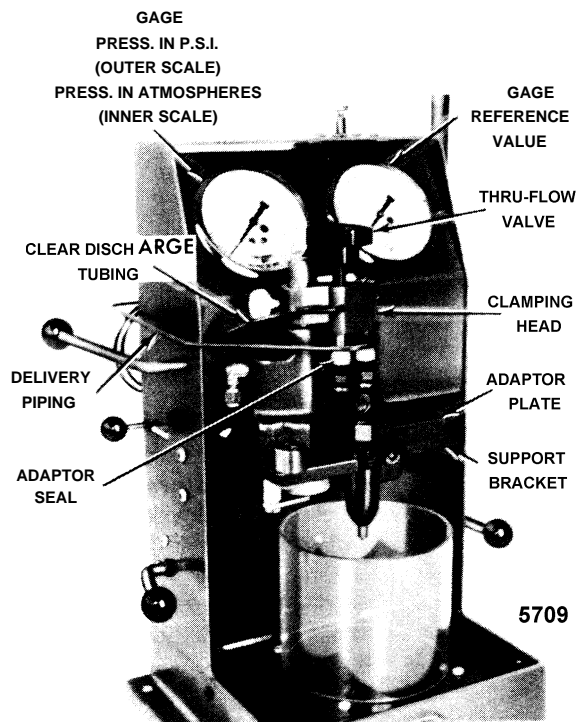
Injector Installed in Tester J 23010-A with Clamping Head
